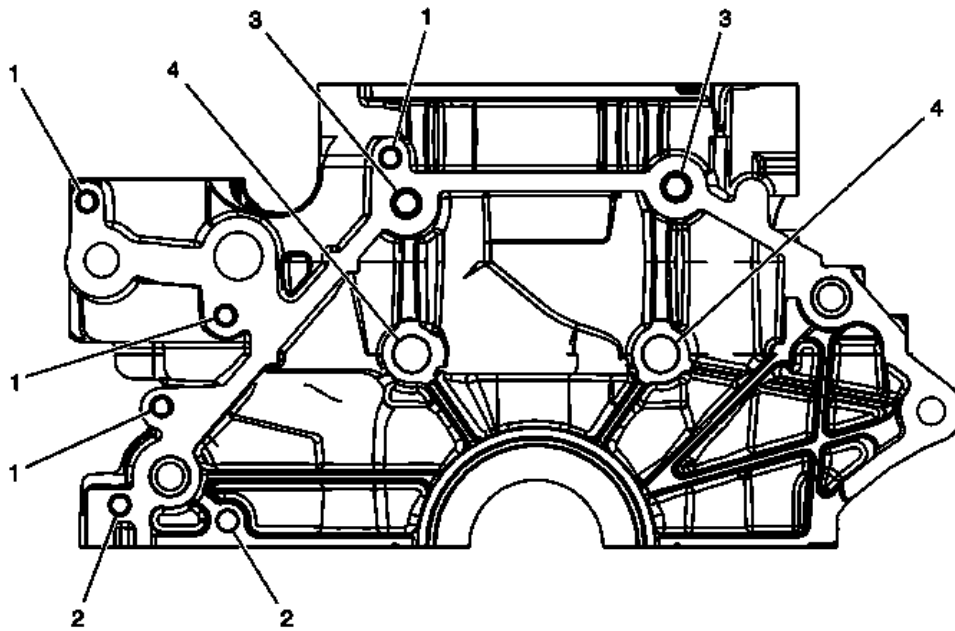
Identifying Bolt Size & Locations On Engine Block - Back View
